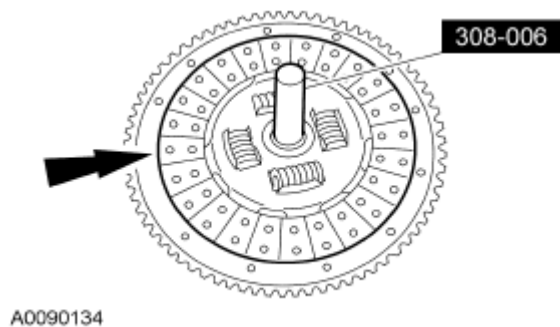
Positioning Clutch Disc On Flywheel Using Special Tool (308-006)
